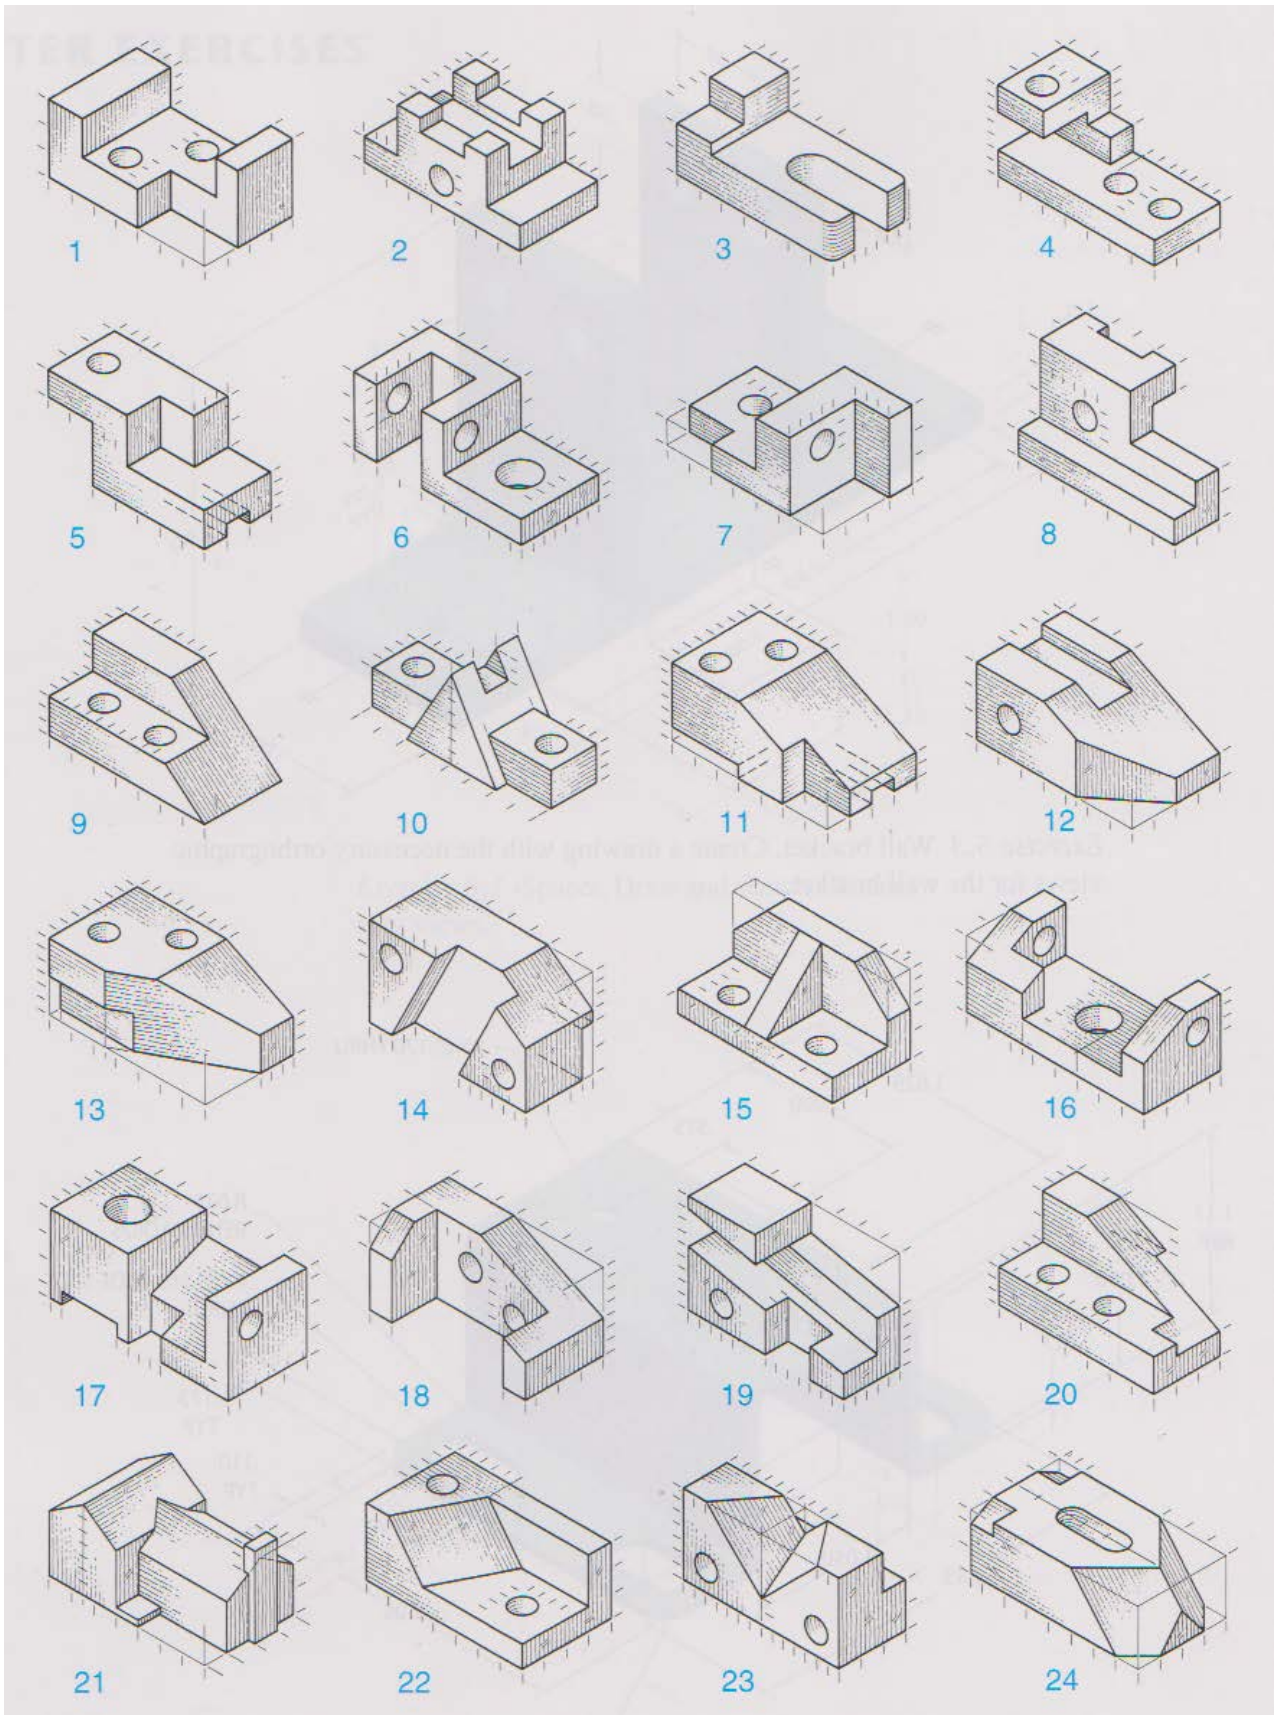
Multiview Sketching Problems Sketch necessary views, using Layout A4 (freehand) on graph paper , two problems per sheet as in Fig 1. The units shown may be 10 mm and 5 mm or two boxes and one box. All holes are through holes
